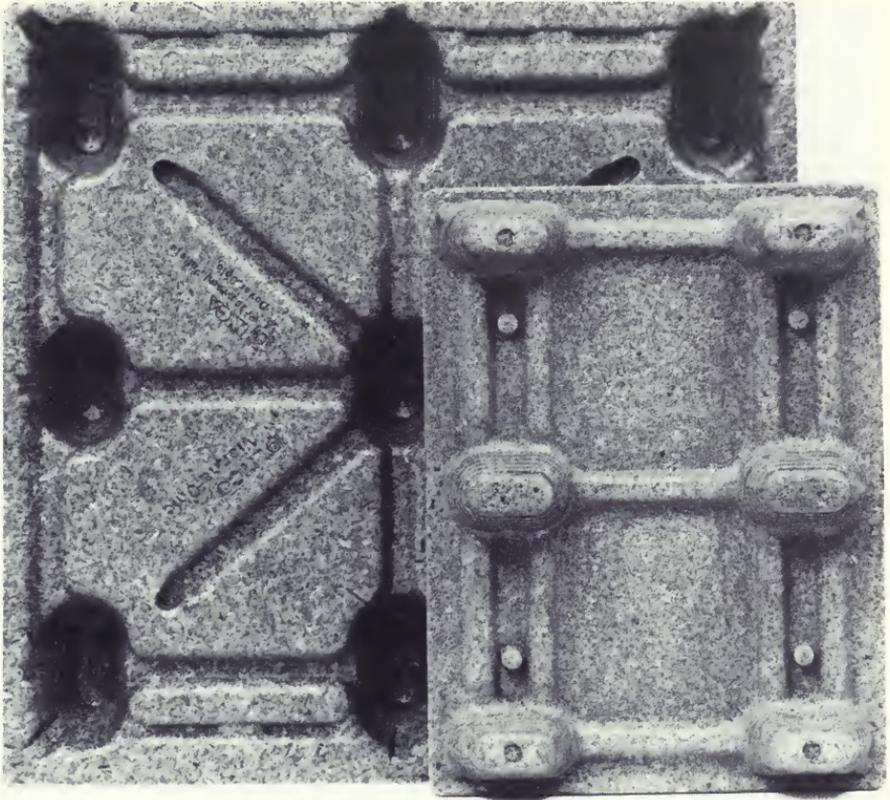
Urea-bonded pallets fabricated from ring-cut particles by the Werzalit process. Large pallet is 42-3/16 by 42-1/16 inches and weighs about 39.5 pounds; small pallet is 31-9/16 by 23-5/8 inches and weighs about 10.4 pounds. Resin-solids content is about 8 percent of oven-dry weight of wood. (Photo from Haas 1980.)
